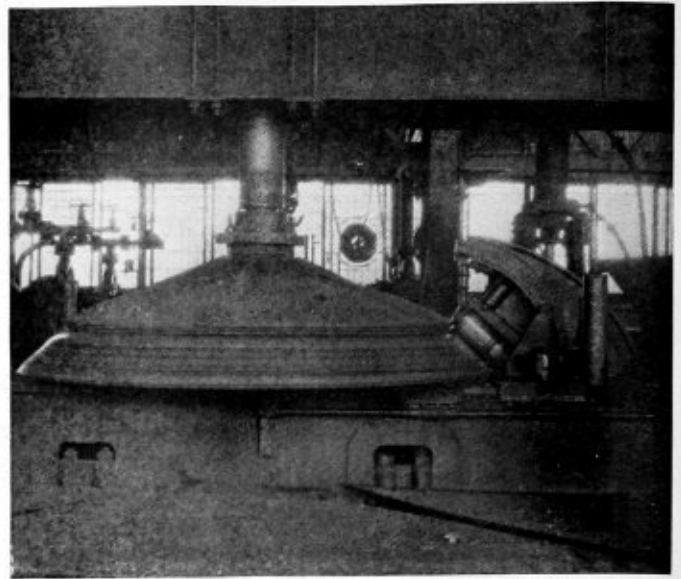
End of First Breaking-Down Operation on 108-Inch Flanged and Dished Head
